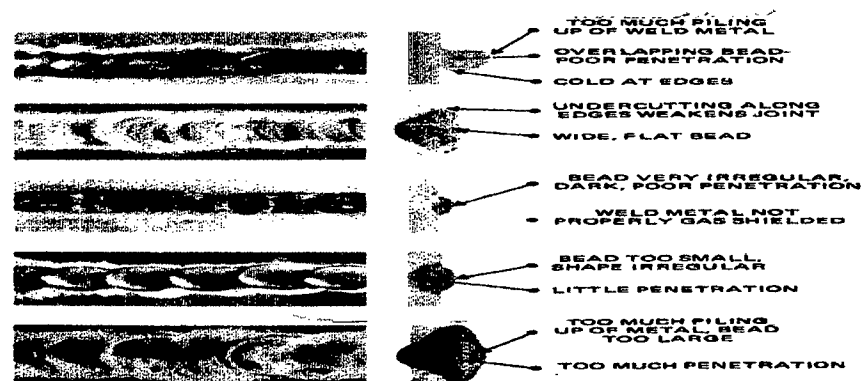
Quality factor for gas tungsten arc welding (B Cary2005)
